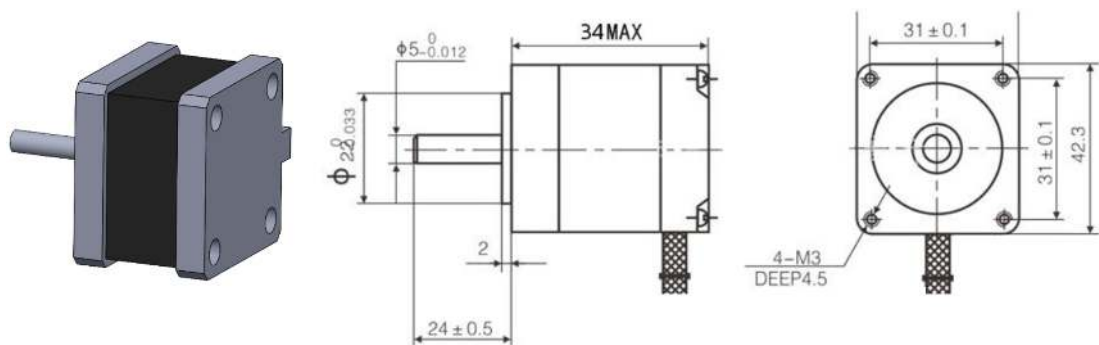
11 An image of the solid and technical drawing of the Nema 17 motor
